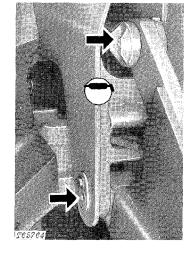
Trail Building Blade and Cylinder Pivots (4 Points)
